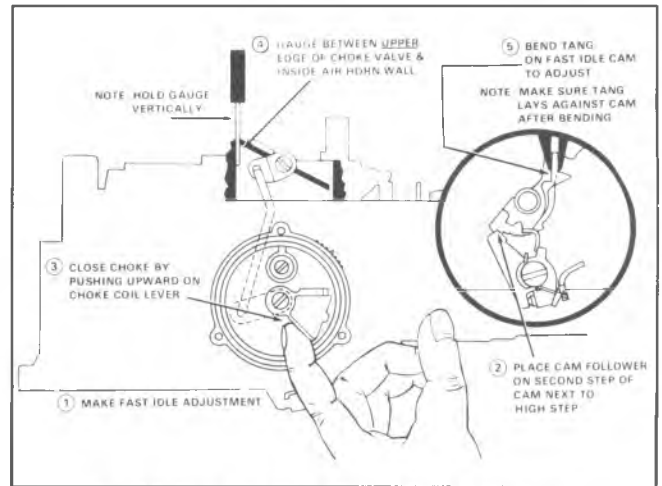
Fast Idle Cam (Choke Rod) Adjustment
